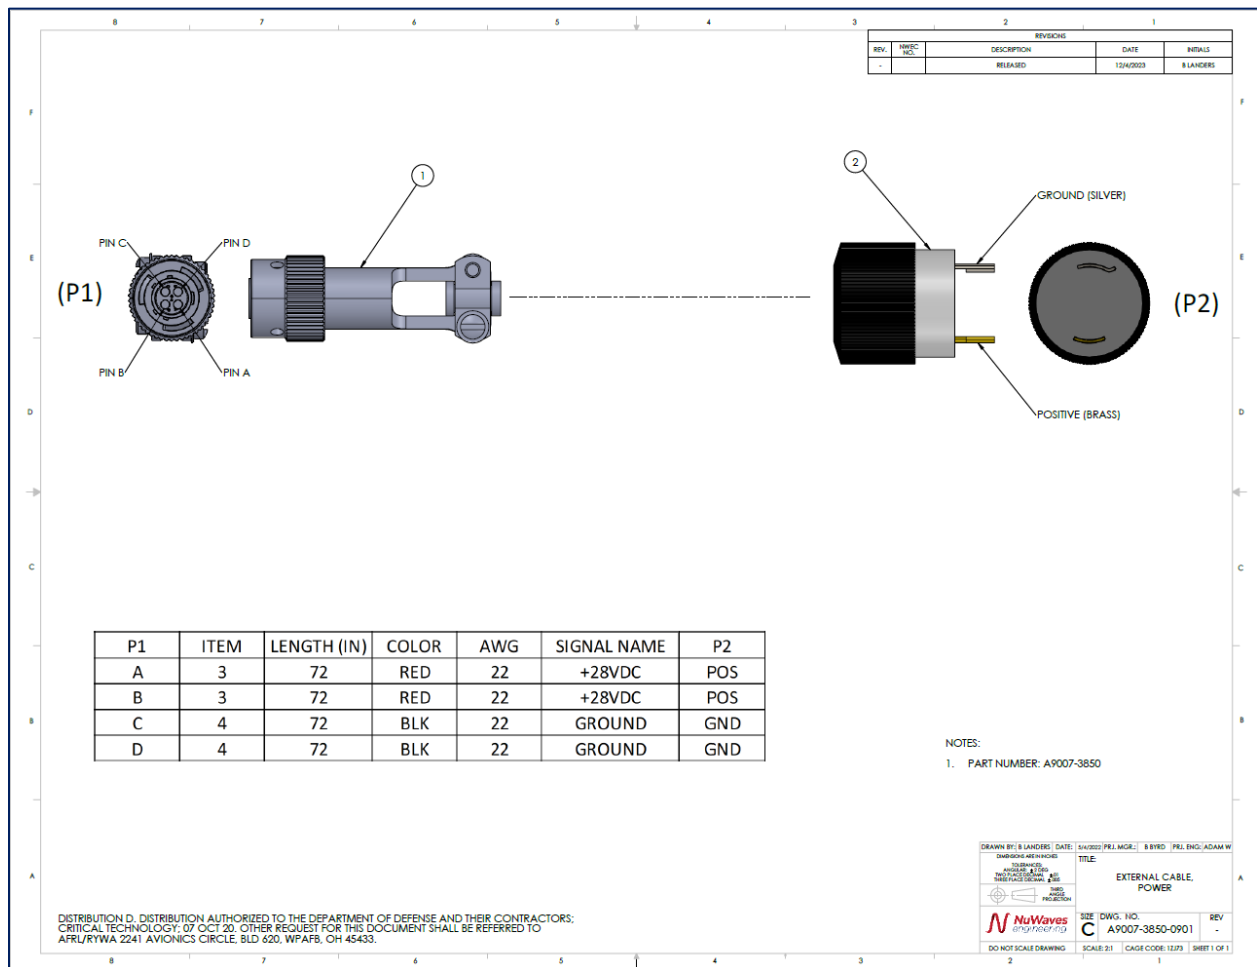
Vibrant J1 – Power Cable (CYB-CBL-06-06)
